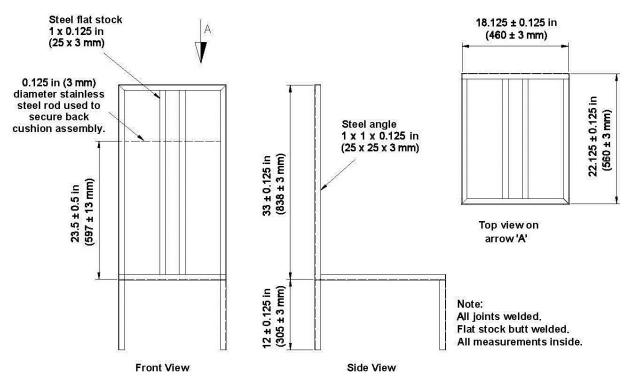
Front, Side, and Top Views of Test Sample Mounting Frame
